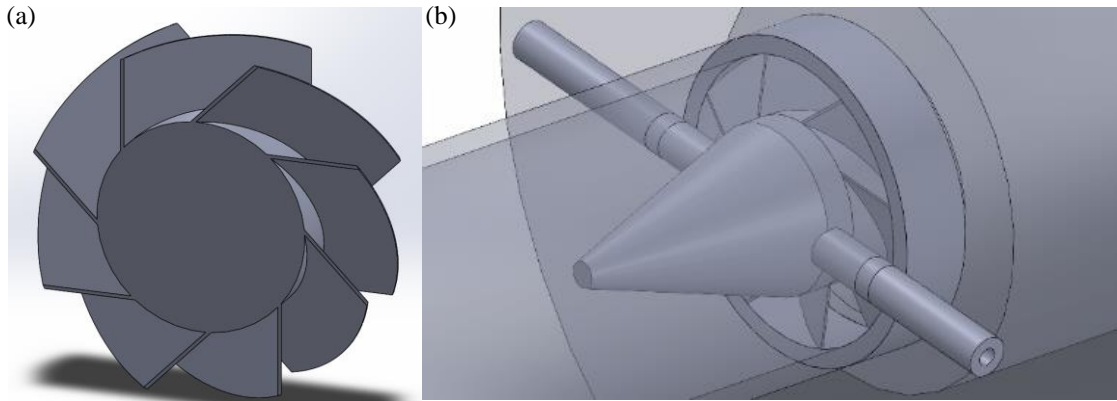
(a) Front view of swirler, (b) Assembly drawing of swirler in guiding pipe
